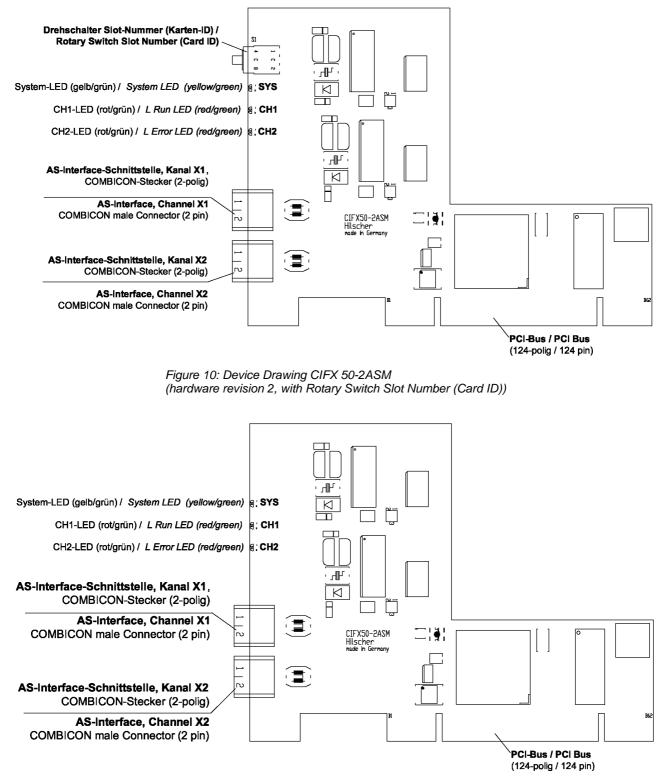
Device Drawing CIFX 50-2ASM (hardware revision 1)
